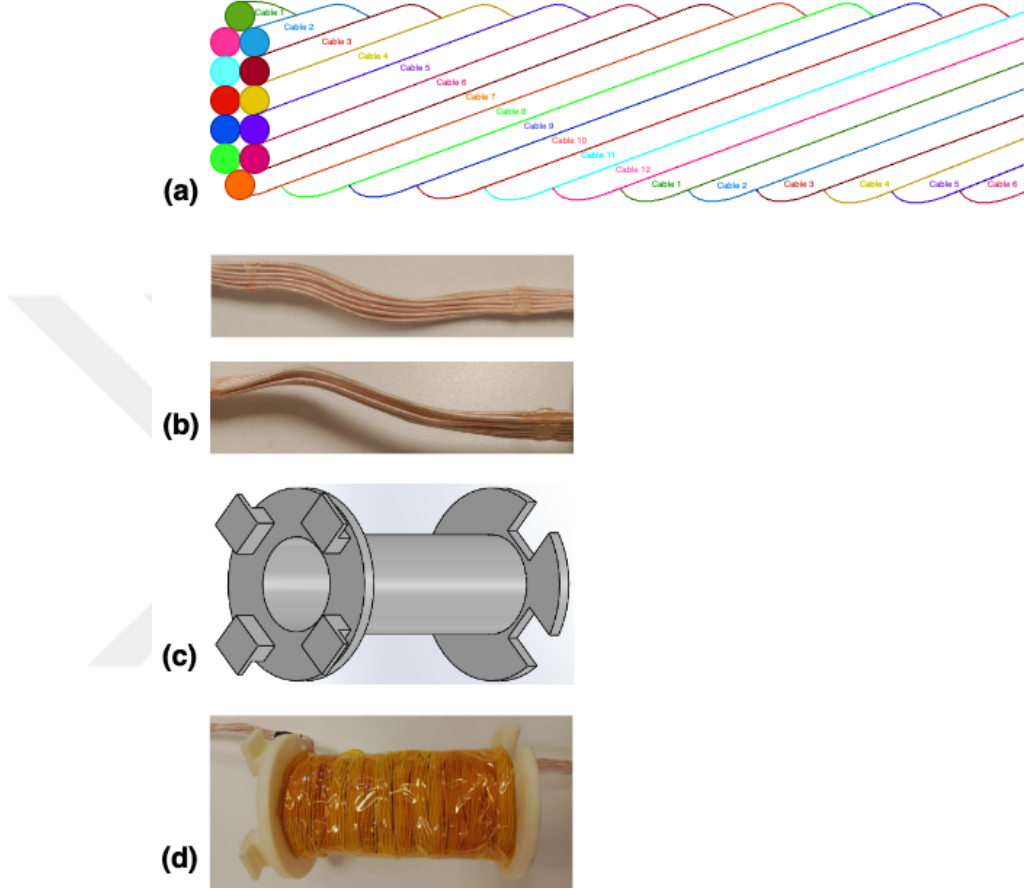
Ruthford cable windings and AW drive coil. (a) Ruthford cable winding technique for a Ruthford cable with 12 Litz wires, twisted together to form a 6×2 rectangular cross-section. (b) Ruthford cable windings prepared for our AW drive coil. Here, the number of windings in the Ruthford cable is chosen as 12. (c) The coil former for the constructed AW drive coil that includes 4 extensions that hold on to the copper shield to ensure accurate positioning. (d) The constructed AW drive coil.
